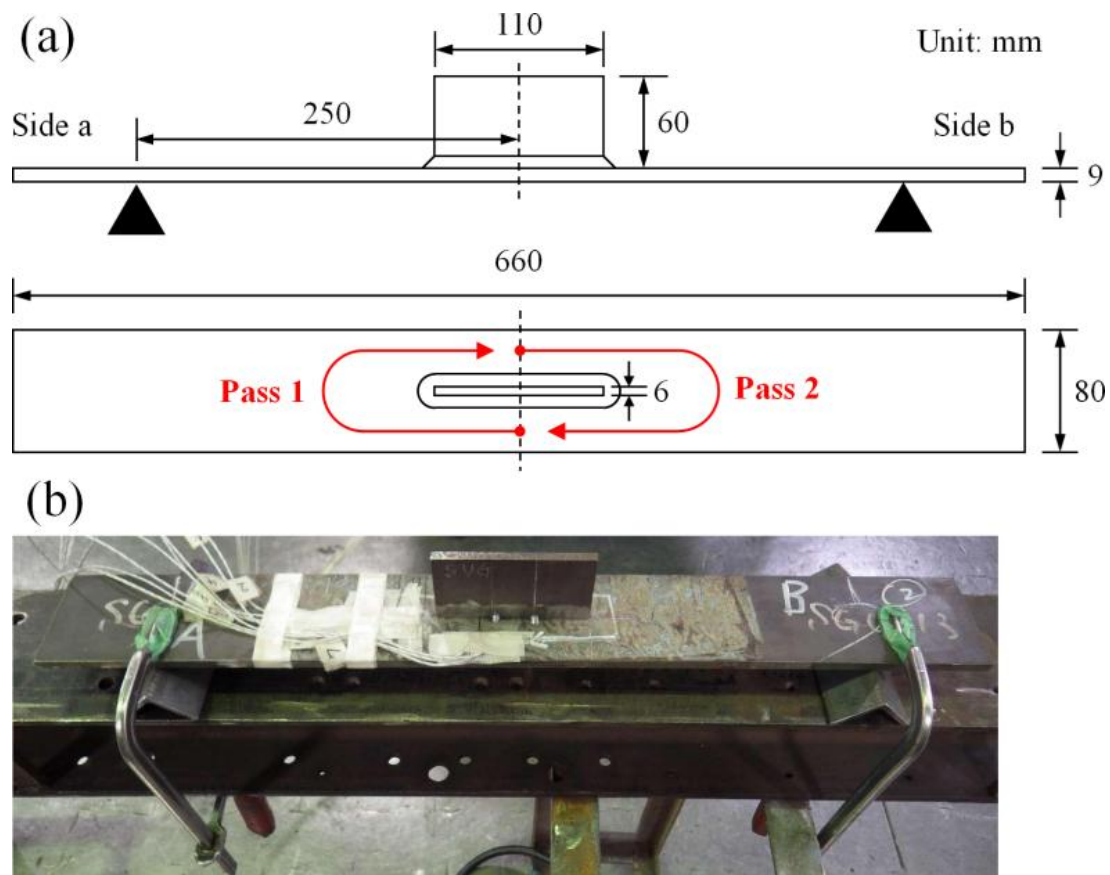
(a) Specimen geometry and welding sequence, and (b) overall photo of specimen and welding clamps.
